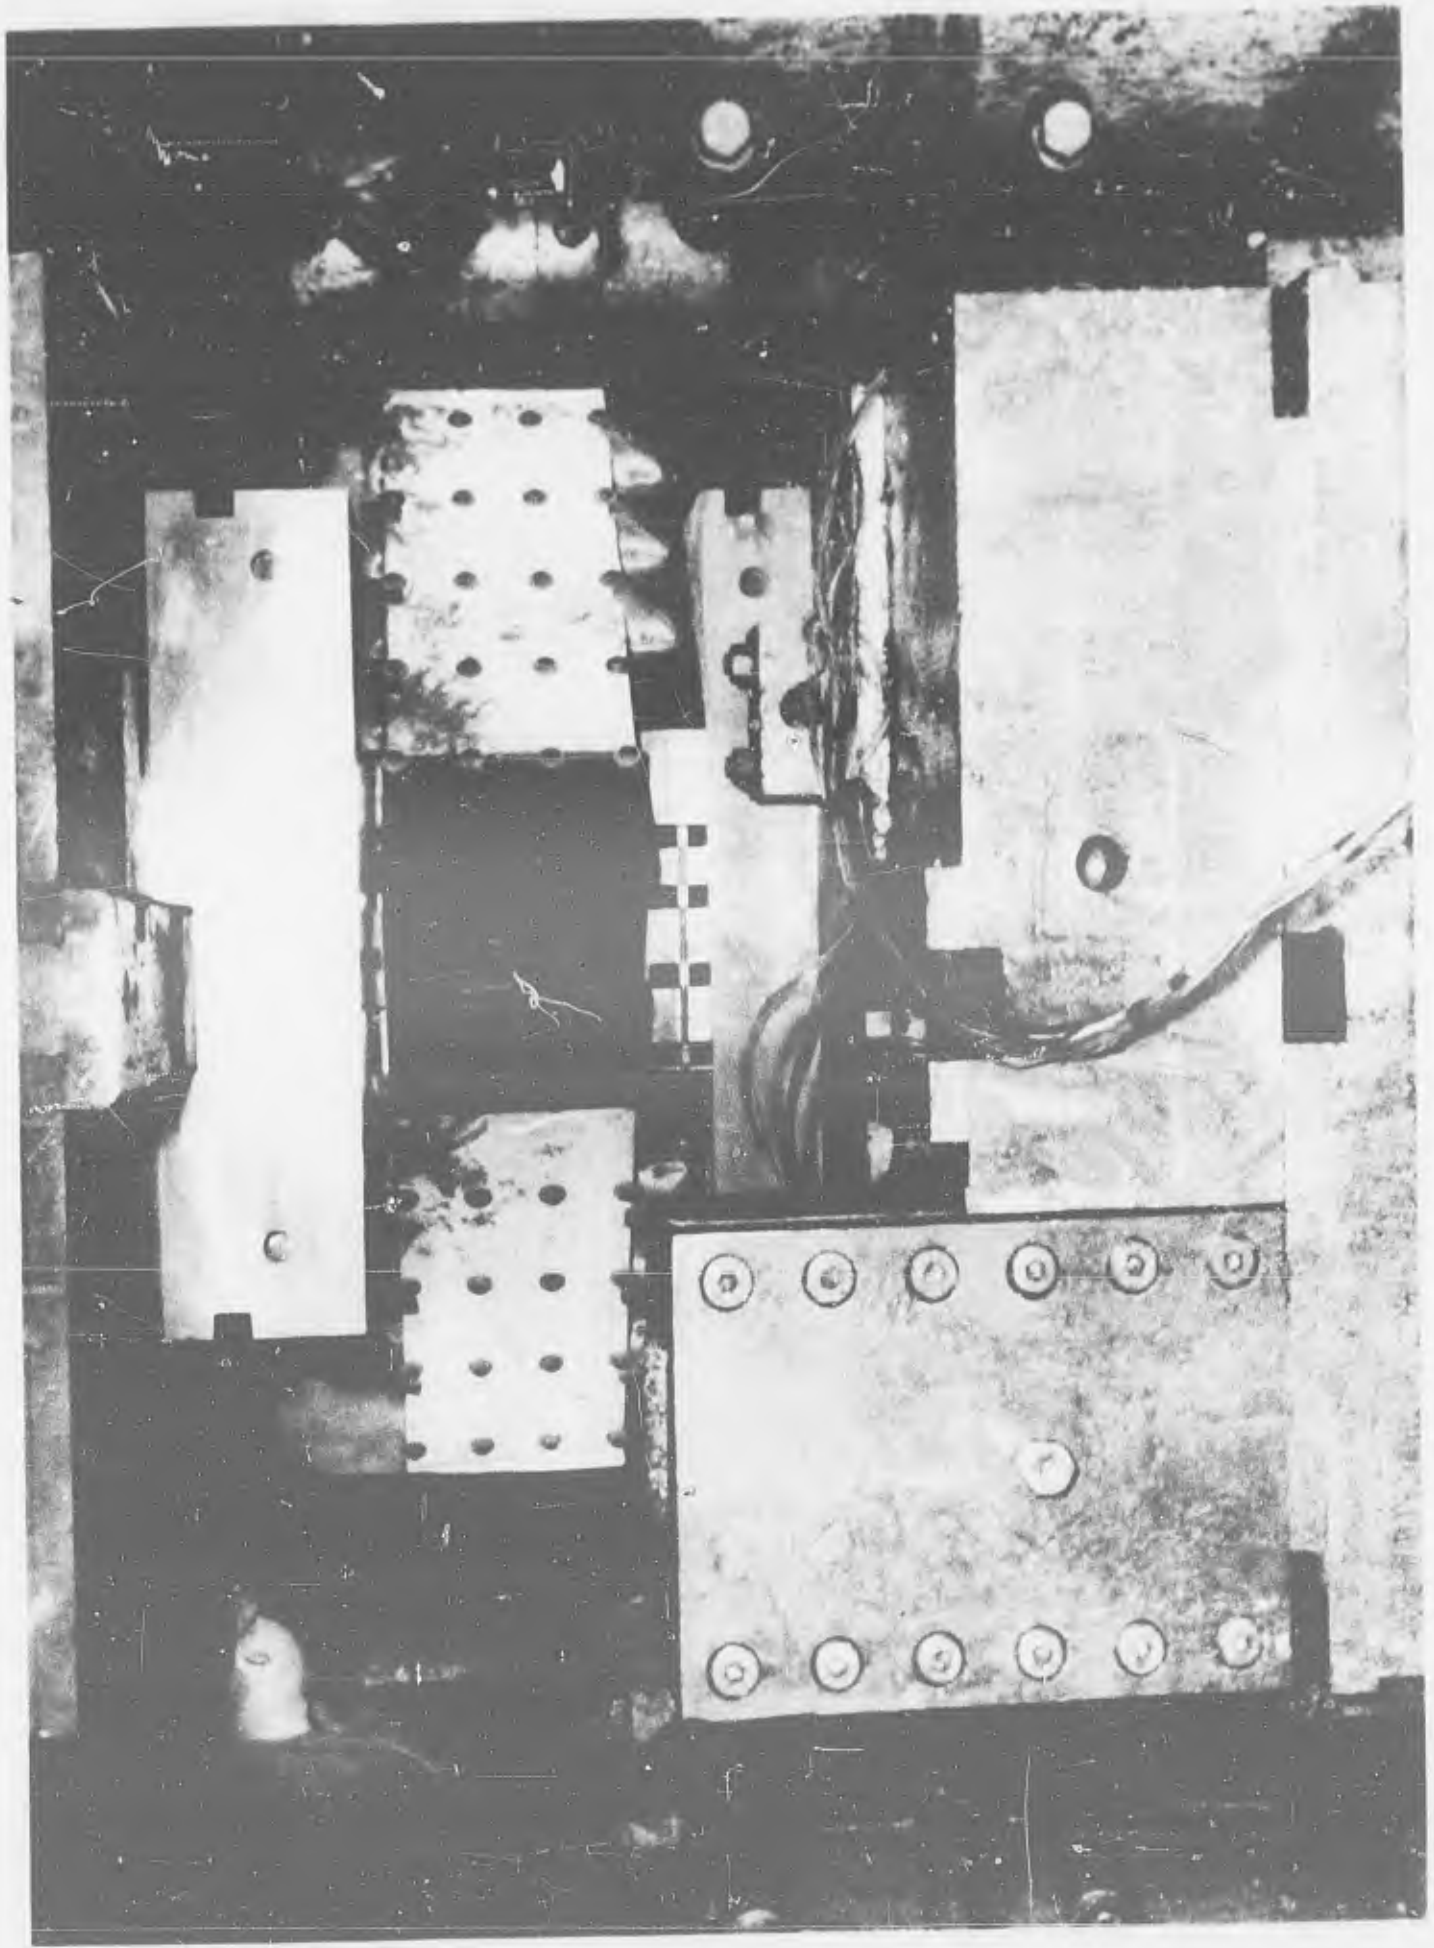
Dies Mounted in 7700 Ton Hydraulic Forging Press.
